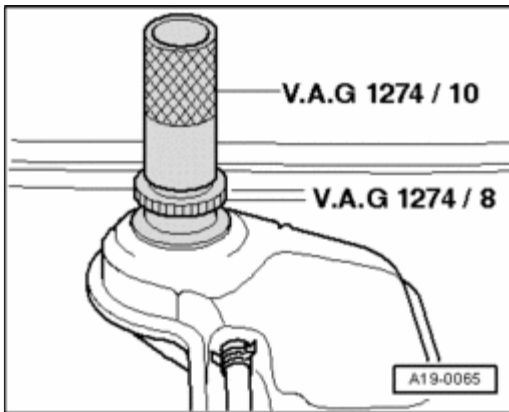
Connecting Adapter For Cooling System Tester V.A.G 1274/10 To Adapter V.A.G 1274/8
